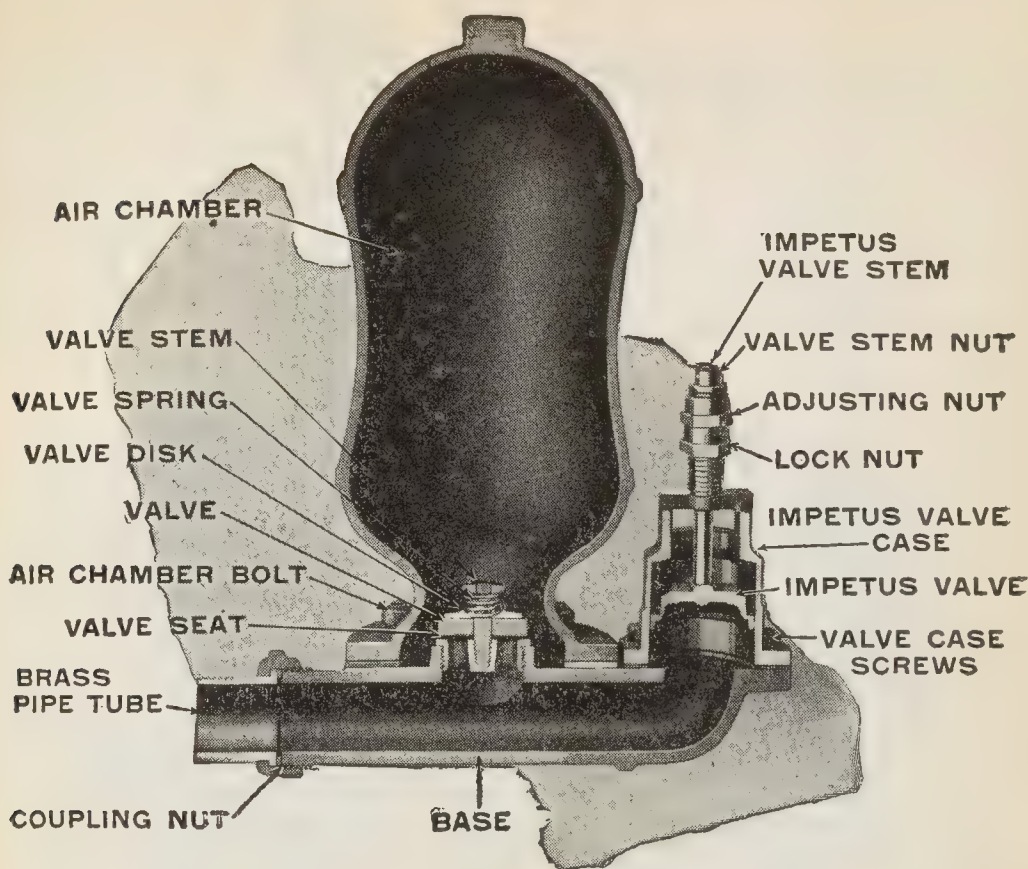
,855.—Sectional view of Deming ram showing construction. *Special installation hints:* The length of the drive or supply pipe should not be less than five times the fall. The fall should not be greater than one-half the elevation nor less than one-tenth, if good results are to be obtained. The discharge pipe may be any length, provided the pipe is of sufficient size. Be sure that all pipe connections are air tight. Connect all pipes before starting the ram, and leave them uncovered until it is found that there are no leaks. The upper end of the drive pipe should always be a foot or more below the surface of the water. It should be located six or more ins. above the bottom of reservoir and a strainer placed on end of pipe. Pipes should be laid straight to reduce friction. Where turns are necessary long bends are better than abrupt angles. Locate the ram in a masonry lined pit, and bolt it on a level foundation. Provide drainage for waste water from the bottom of pit. Place all pipes below the frost line. When the ram is placed in a pit have pit large enough in diameter so it is easily reached for adjustment or repairs.
